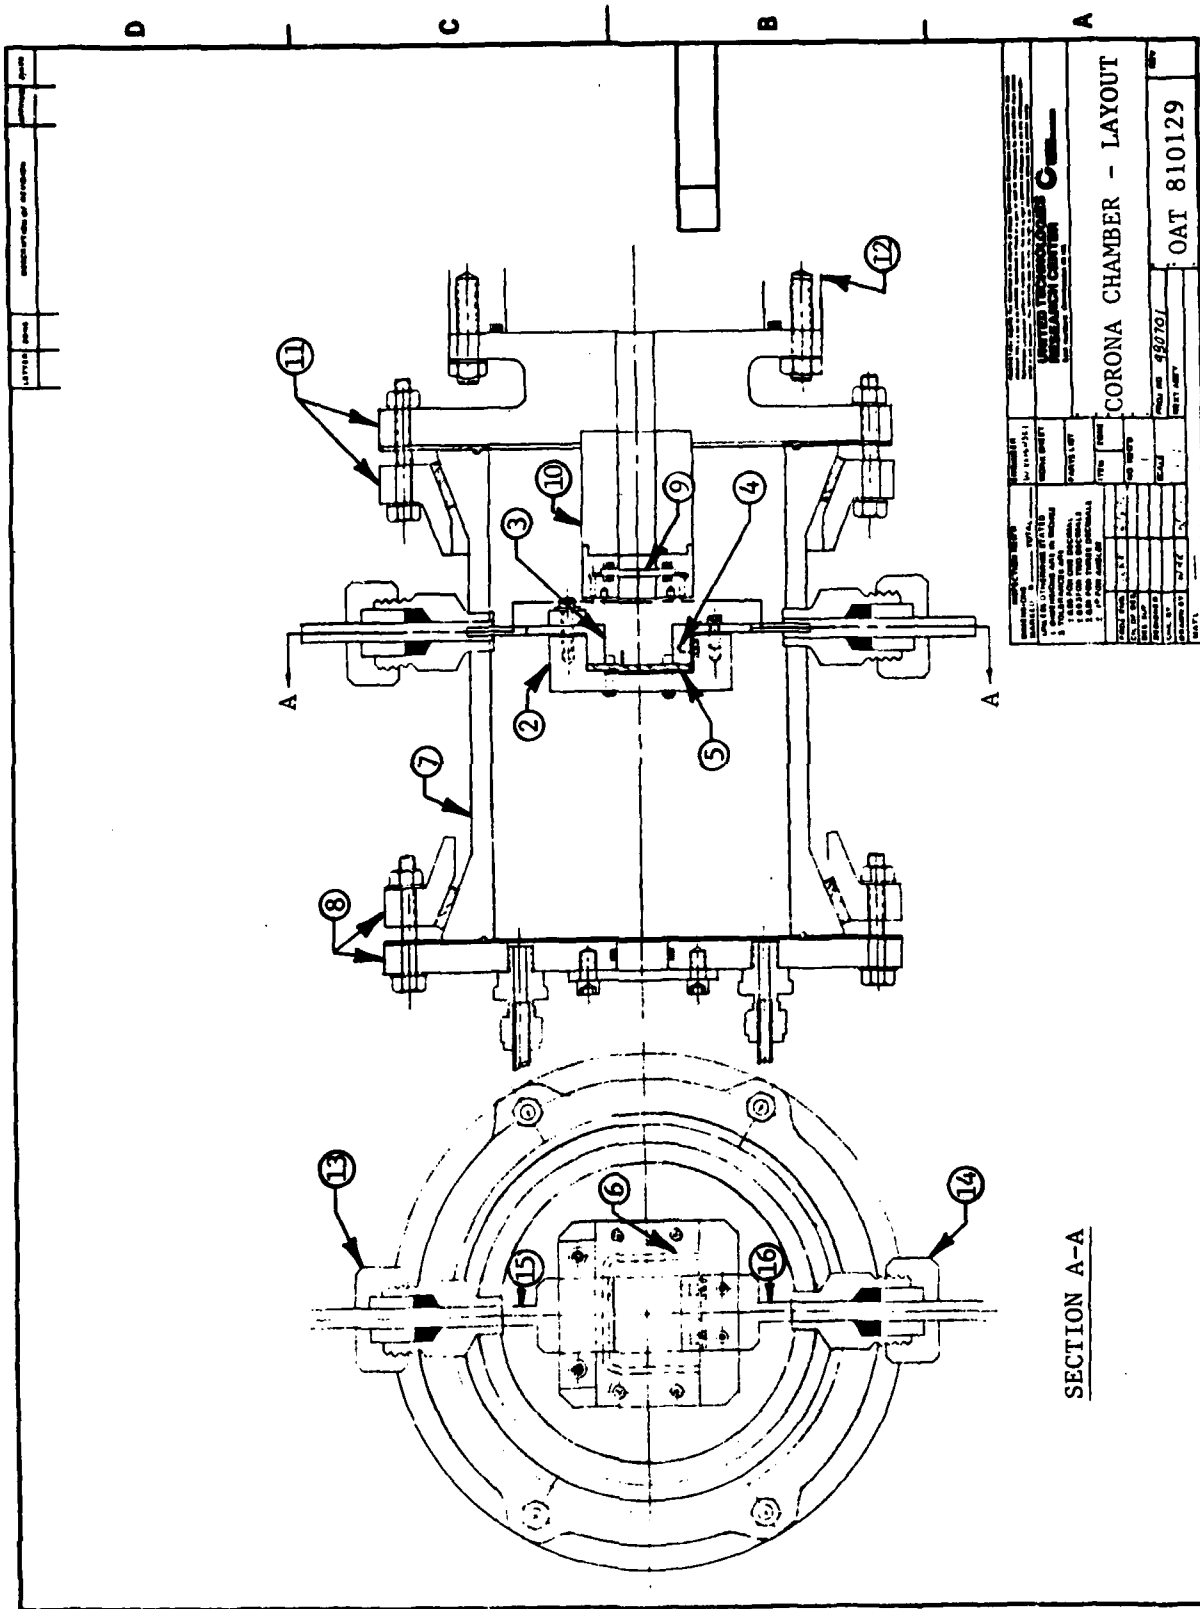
Layout drawing of corona discharge experimental apparatus.
